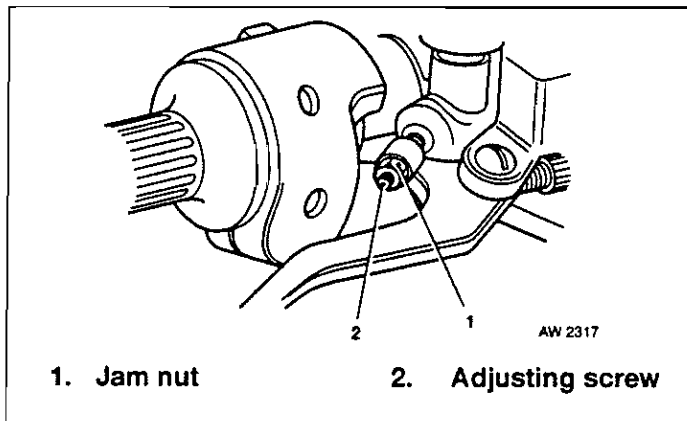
Front Brake Control Lever Free Play Adjustment
